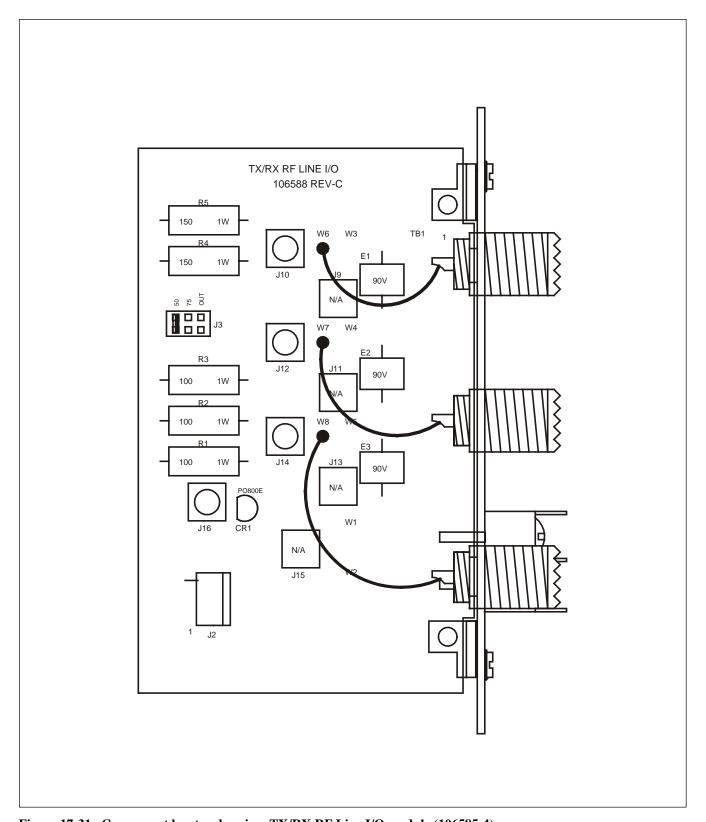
Component locator drawing, TX/RX RF Line I/O module (106585-4)
